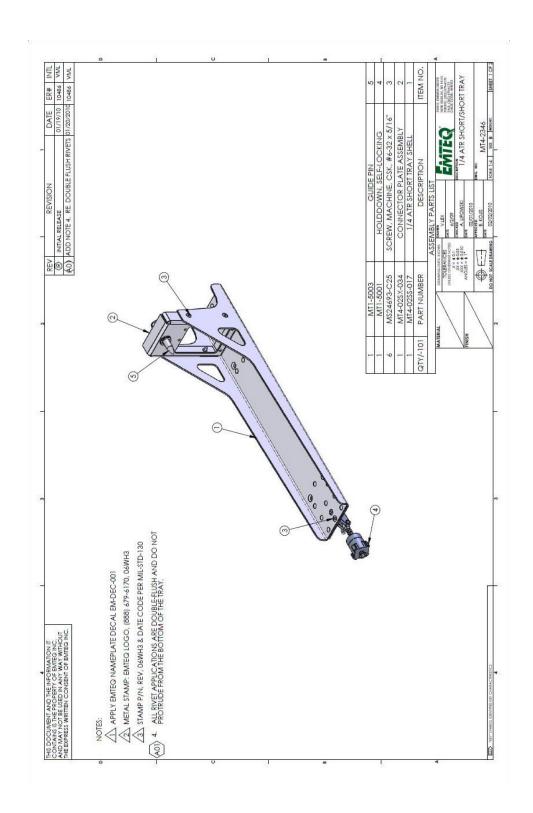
Outline drawing: SBU tray: EMTEQ MT4-2346-101 (page 1)
